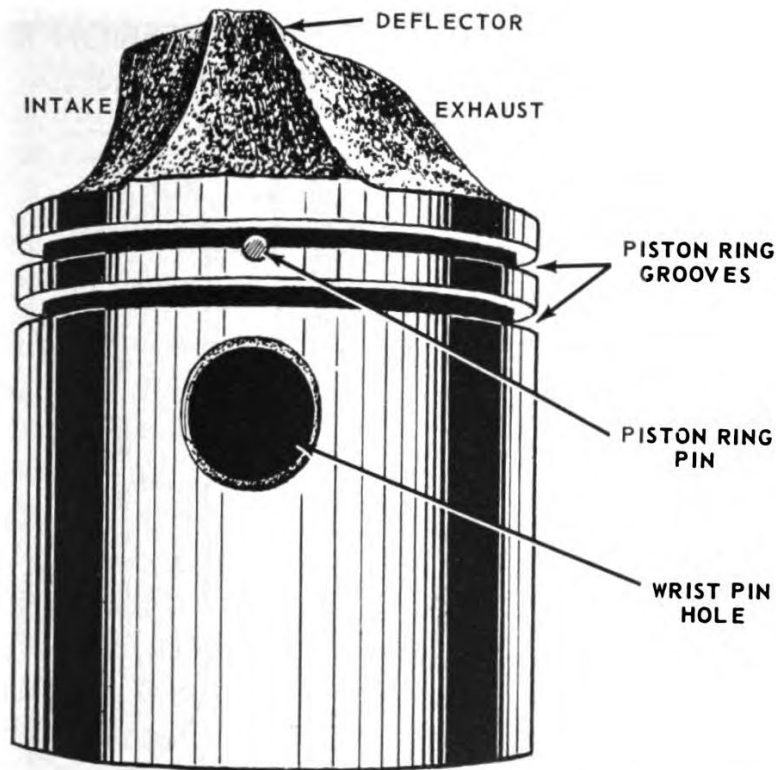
Trunk type piston (Johnson engine, P-500).
